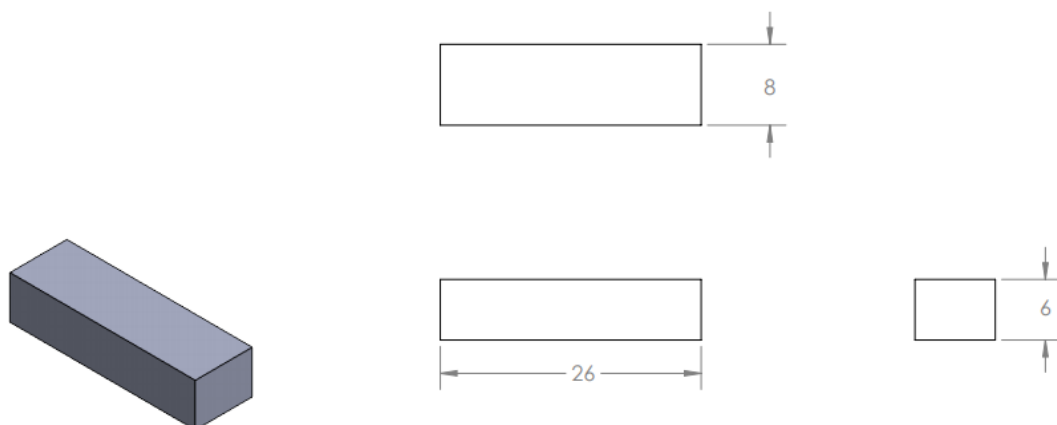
Dimensioned microstructure and micro-hardness testing specimen without weld
